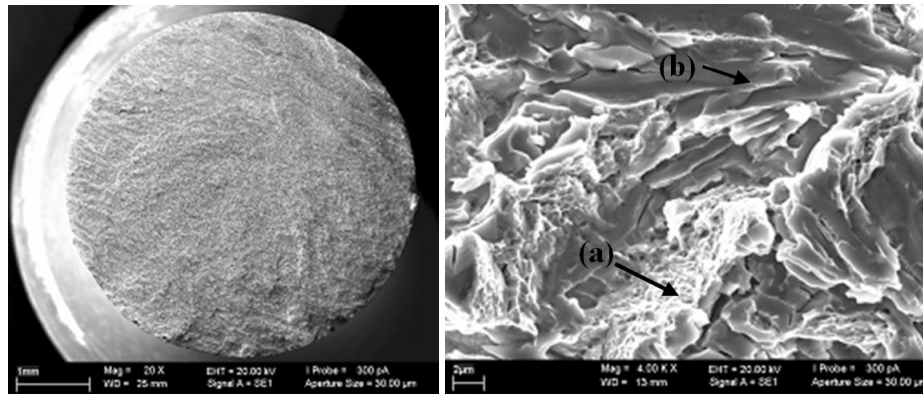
Micrographs of fracture surface of fatigue specimen: (a) ductile fracture zone and (b) brittle fracture zone.
